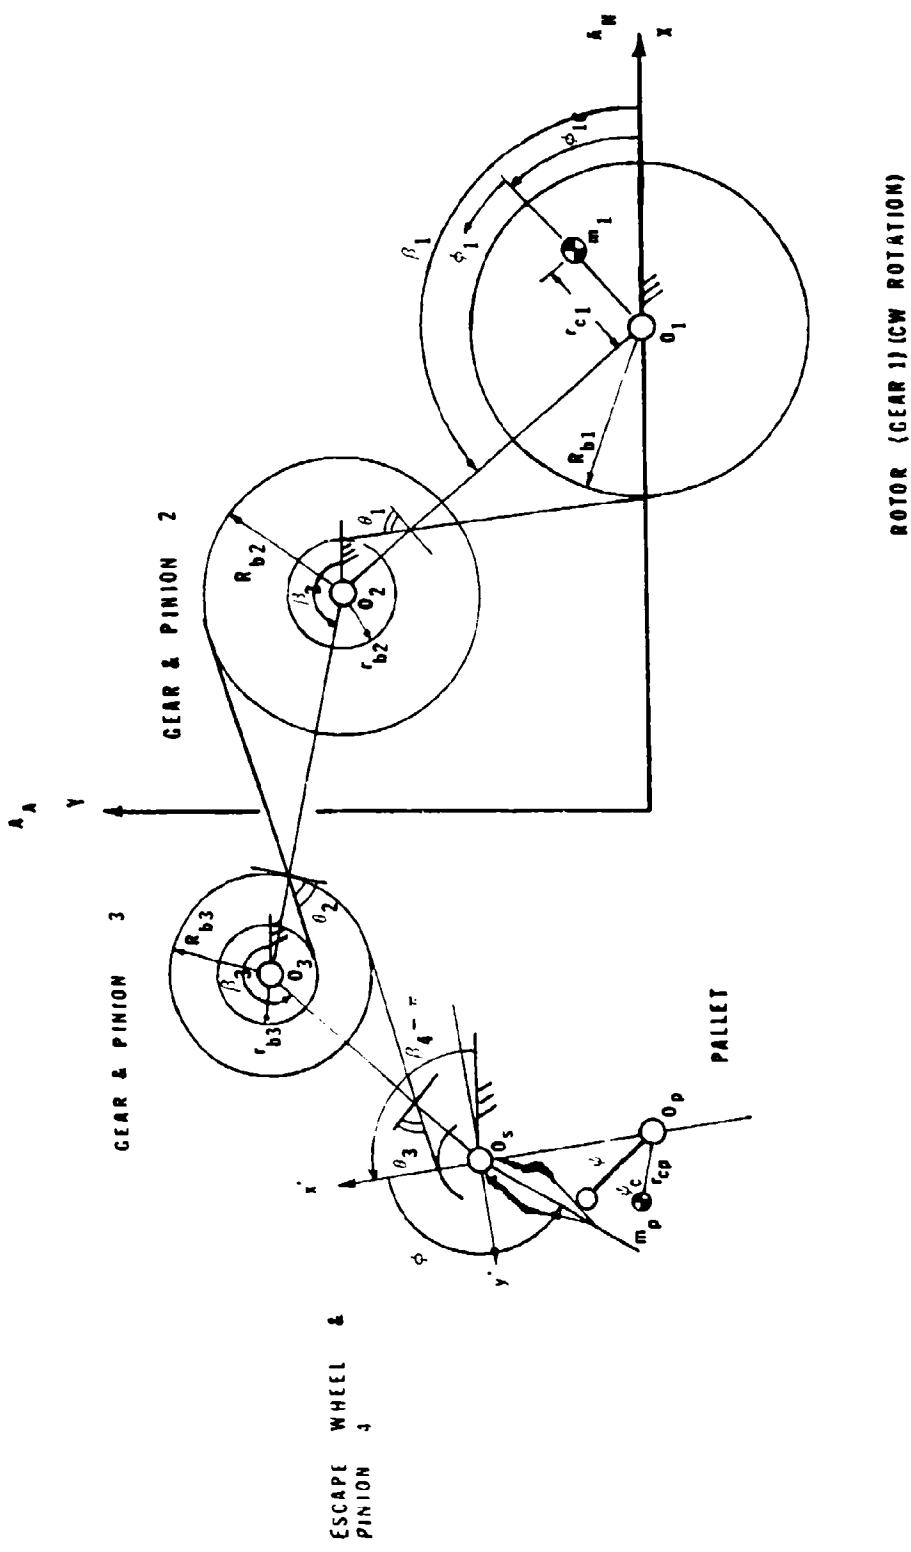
Rotor driven S&A device with three-pass involute gear train and pin pallet runaway escapement
